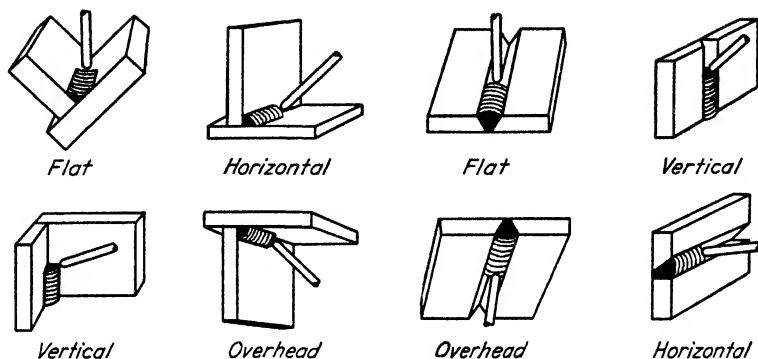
Welding positions. From H. Malcolm Priest, *Practical Design of Welded Steel Structures*, American Welding Society.
